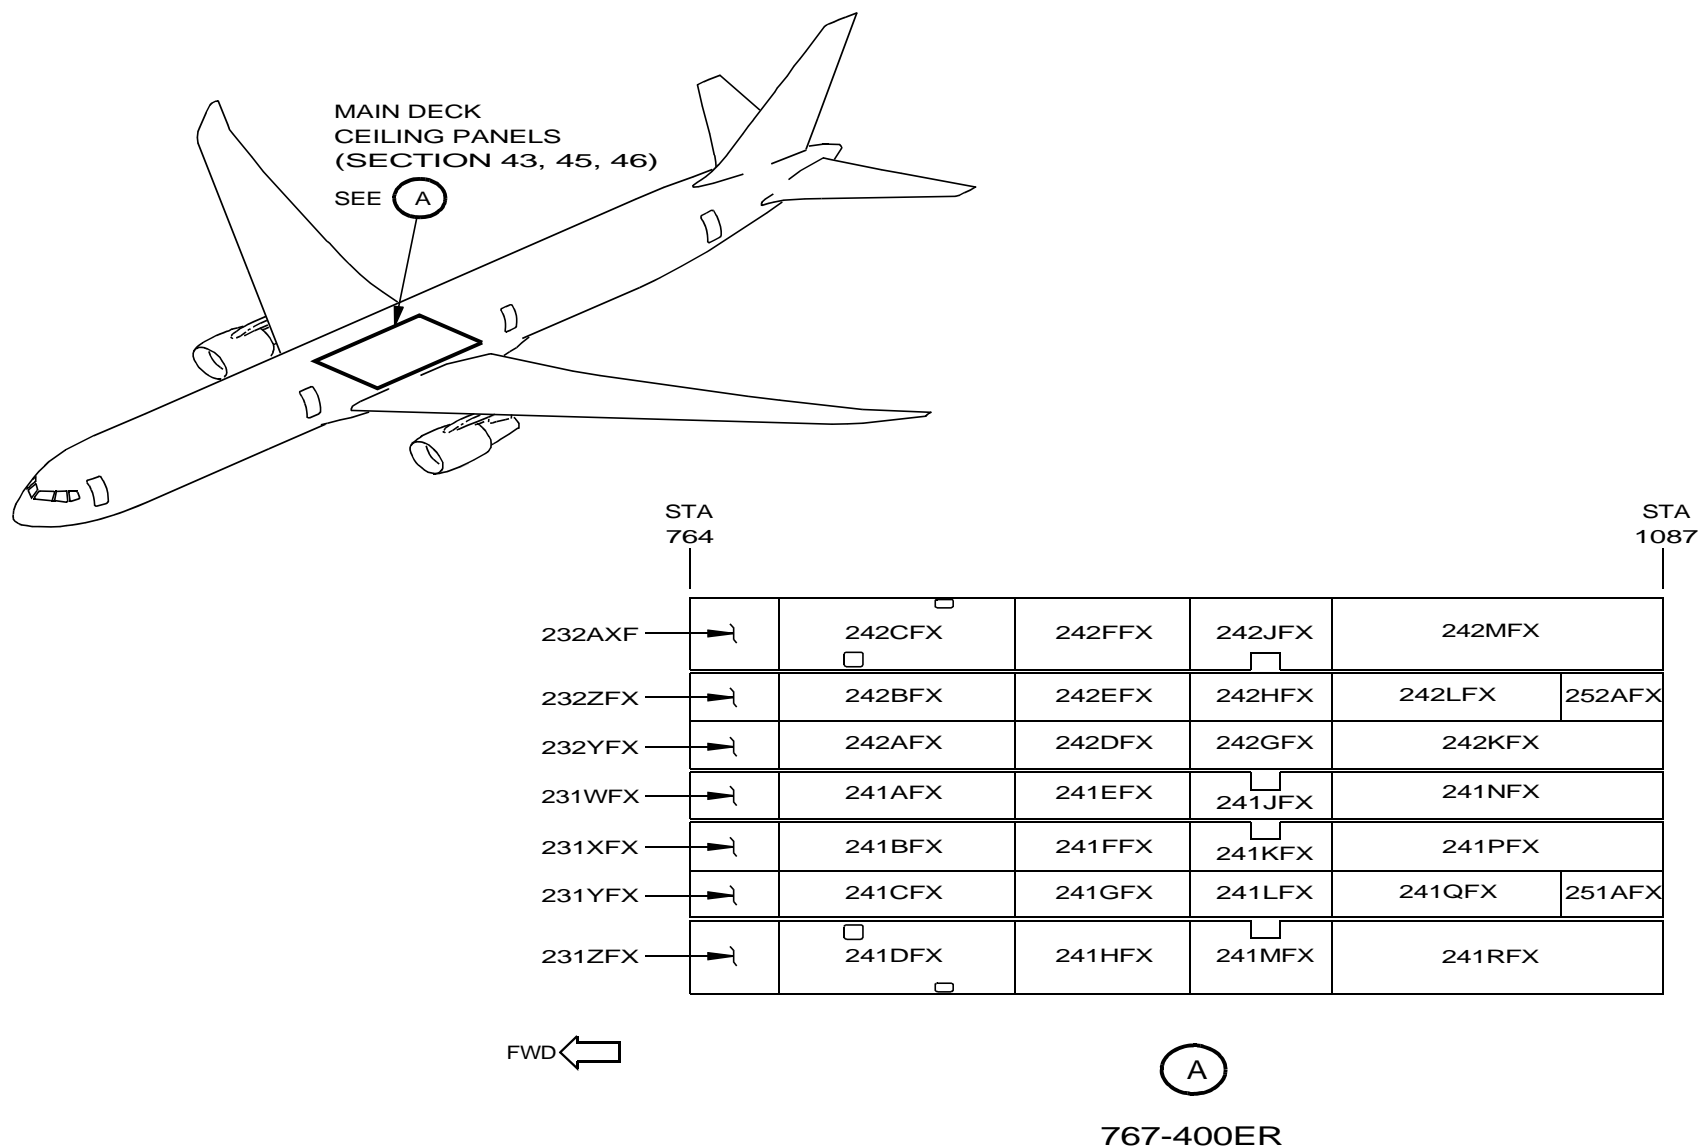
SUB-MAJOR ZONE 231/232, 241/242, 251/252 PASSENGER CABIN FLOOR PANELS BS 764 TO BS 1087 (-400ER)
